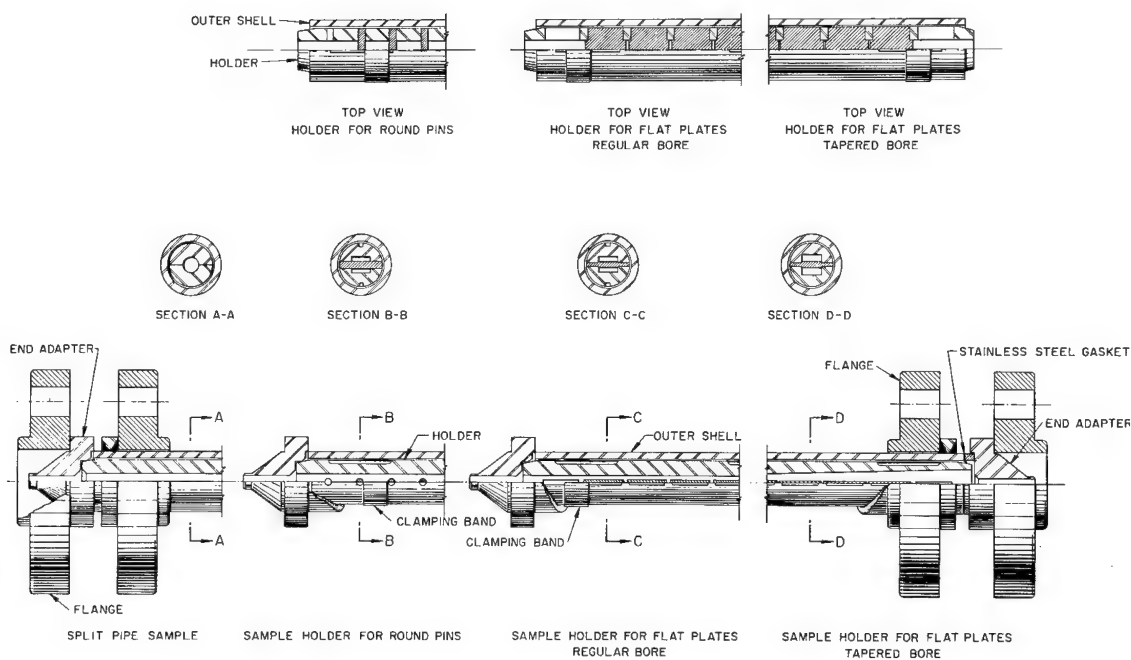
Details of uranyl sulfate corrosion specimen holders.
